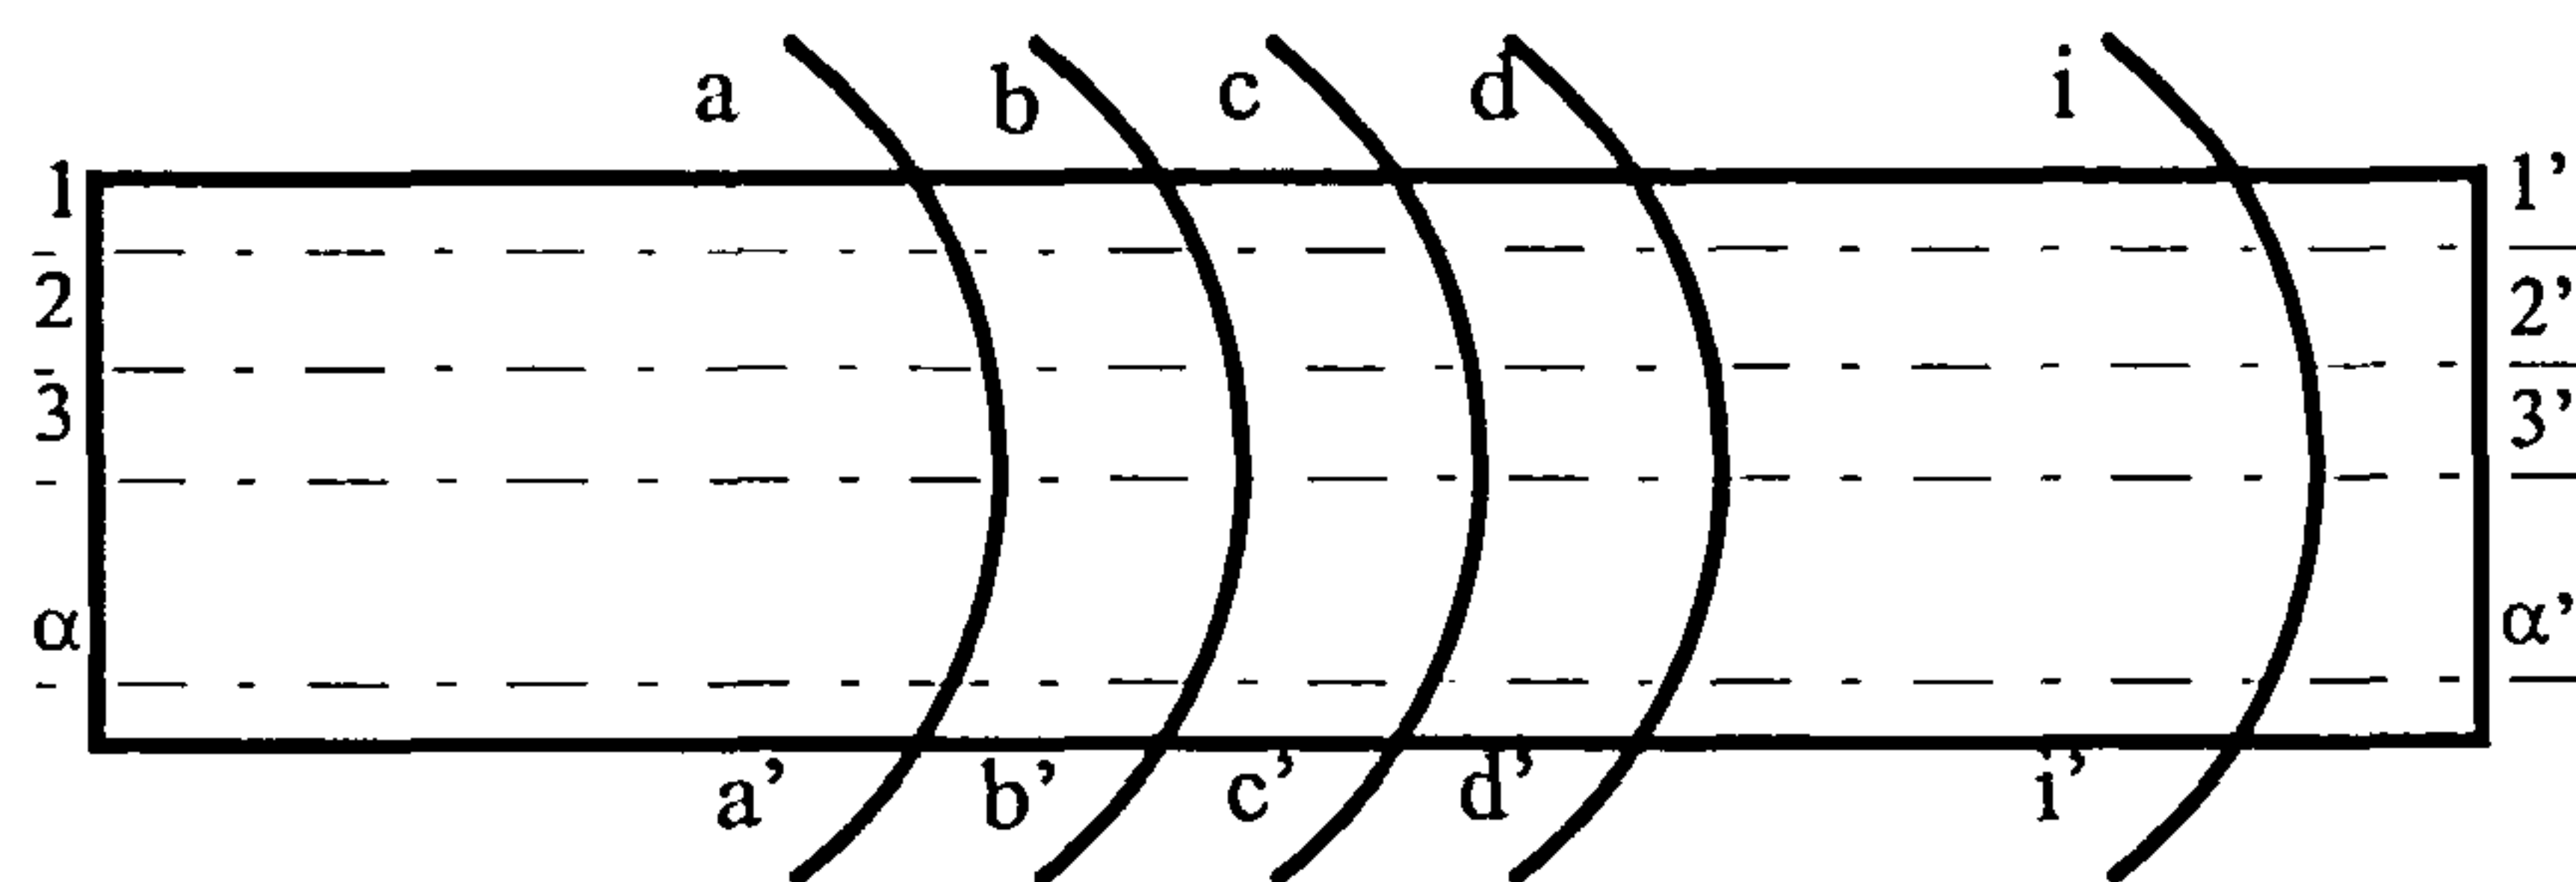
Suggested mechanism for the formation of the machined surface in face milling.
